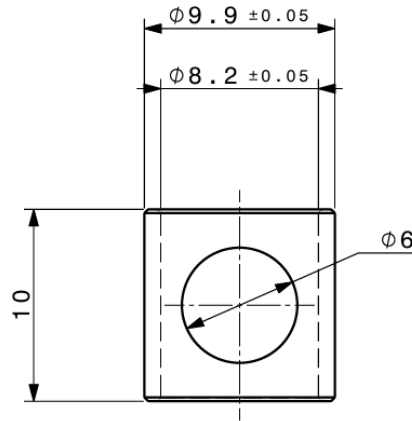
Shaft spacer component - Spacer 1 [4].
